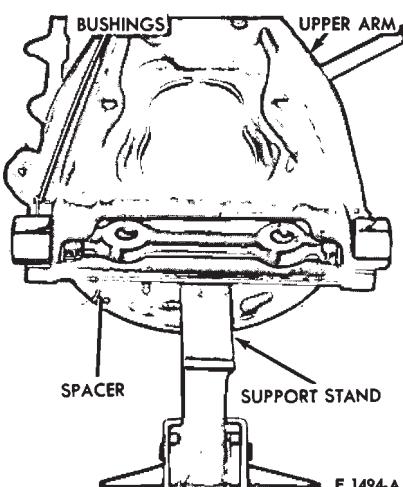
Torque Upper Arm Inner Shaft Bushings—Typical
